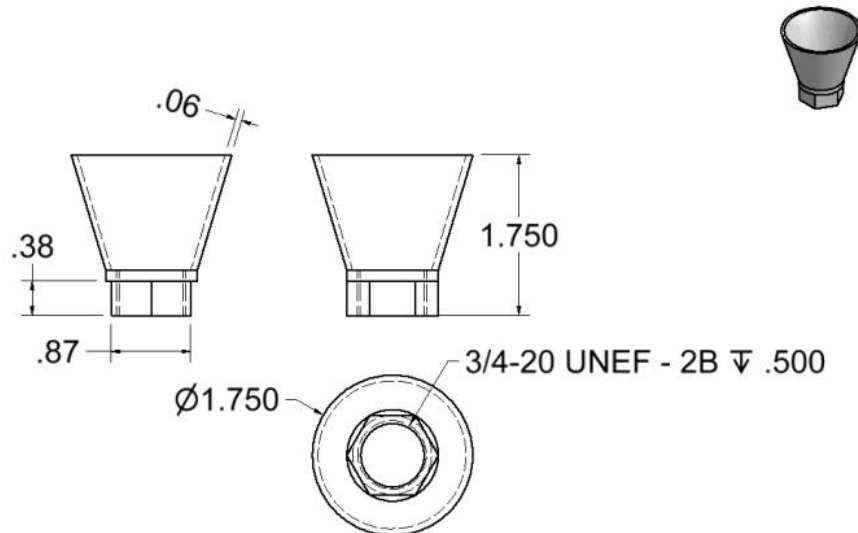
Mechanical drawing for nozzle (DADD component 4)
